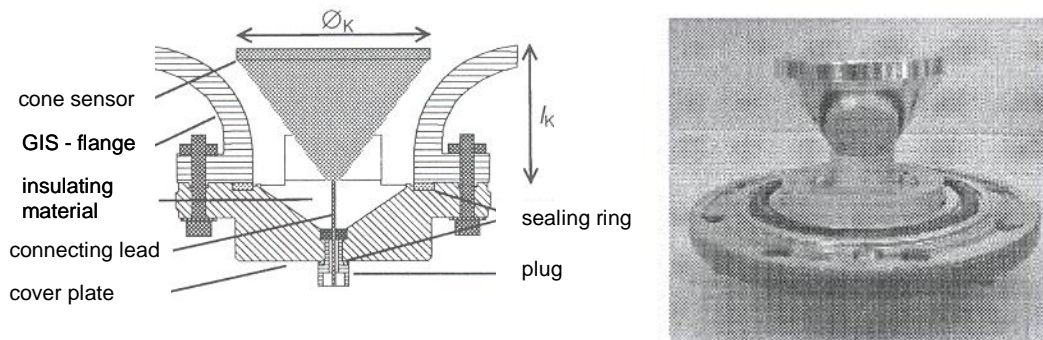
Sectional view and mounting of an UHF PD cone sensor [1]
